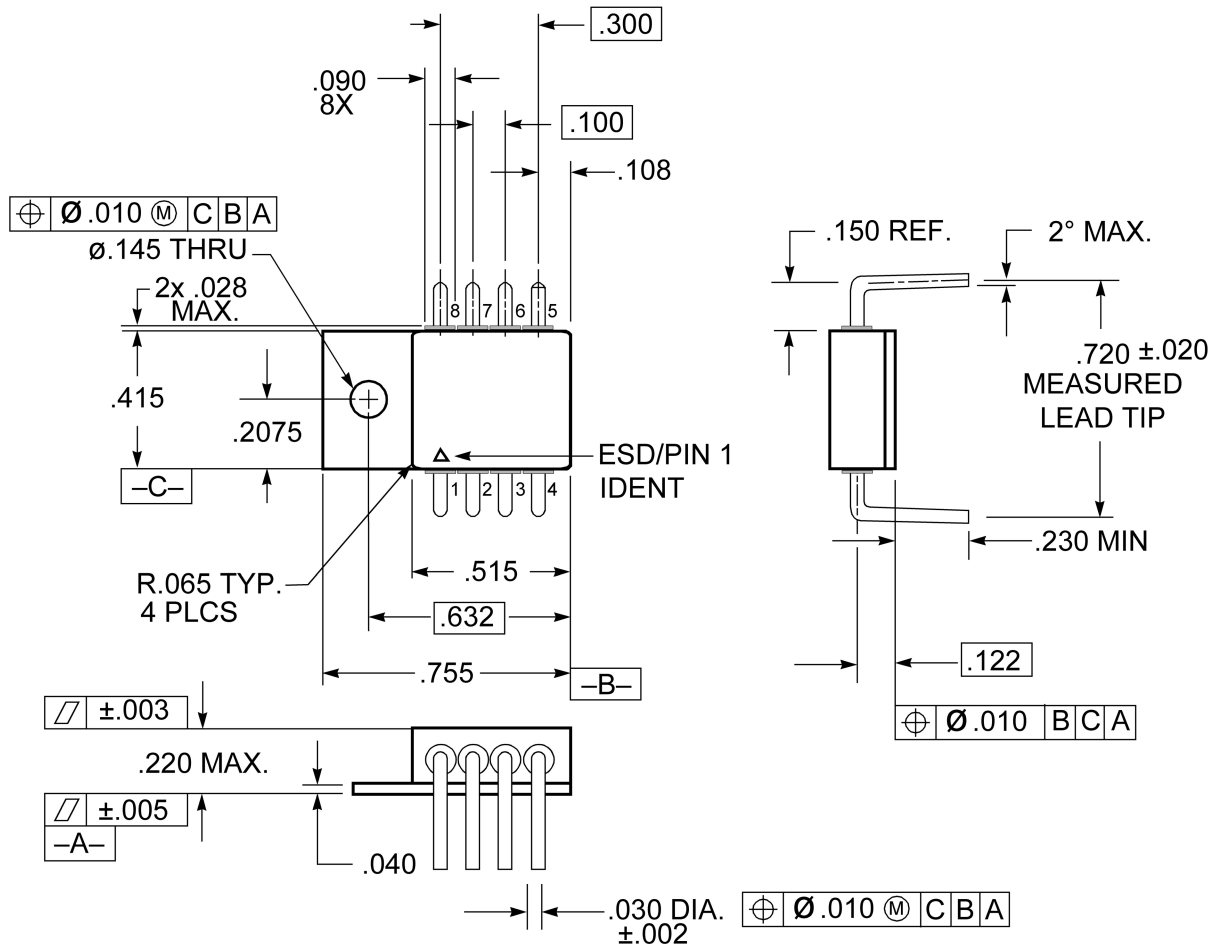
VRG8667 Package Outline — Thru-Hole Power Package
